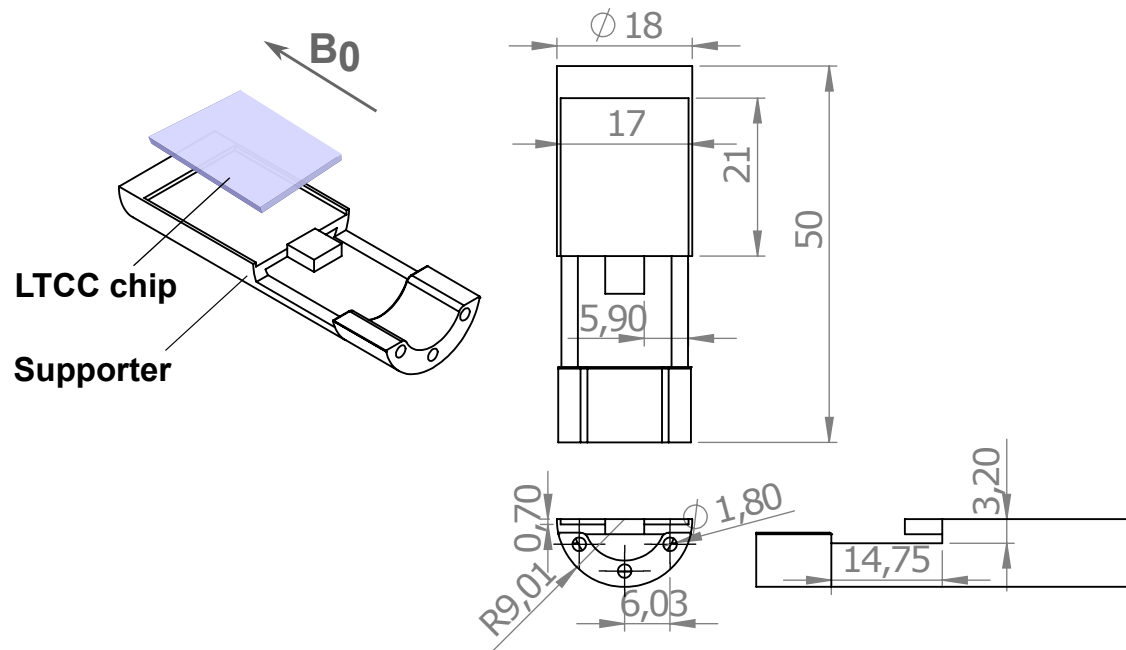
Assembly of the chip model with SLA 3D printed supporter. The dimensional parameters are shown in 3 views in mm.
